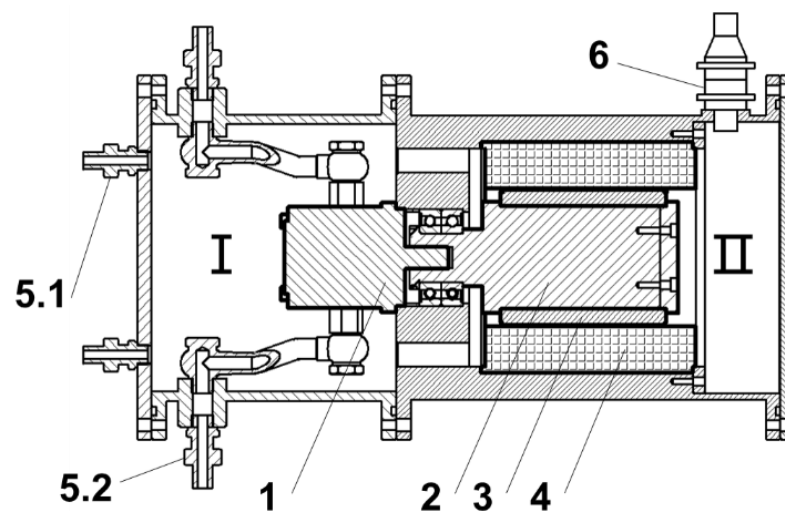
Structure diagram of the deep-sea oil-filled motor. I—Pump chamber; II—Motor chamber; 1—Gear pump; 2—Inner shaft of rotor; 3—Permanent magnet; 4—Motor stator; 5.1—Straight pipe joints for compensator; 5.2—Straight pipe joints for valve box; 6—Watertight cable.
